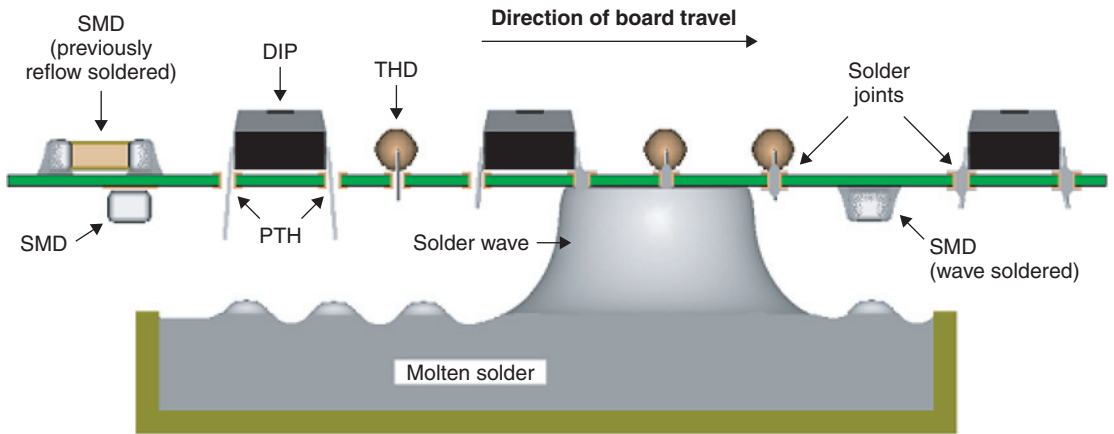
Wave soldering (side view). DIP, dual inline package; PTH, plated through-hole.
